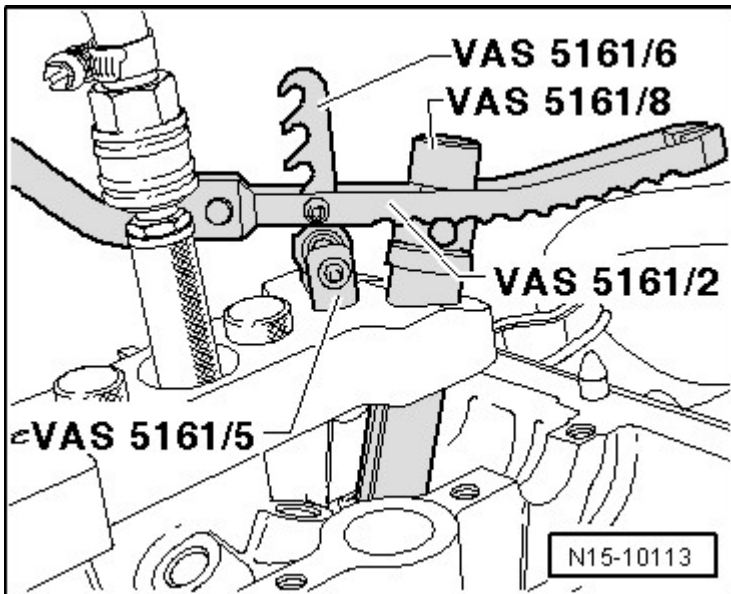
Identifying Pressure Forks VAS 5161/2 Engaged
